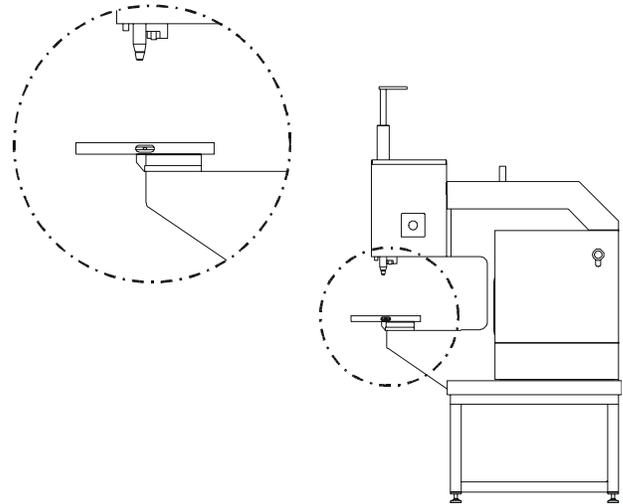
Level the machine by using the Lower Tool Holder as a reference surface
